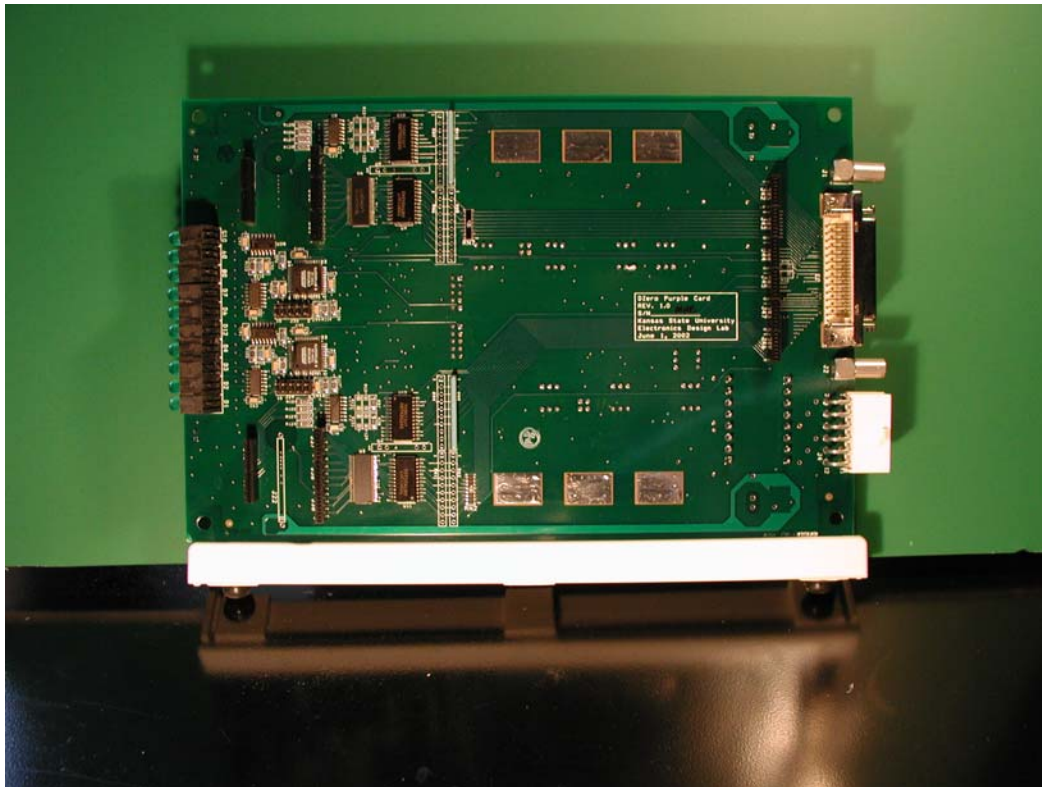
Bottom view of 1<sup>st</sup> prototype
